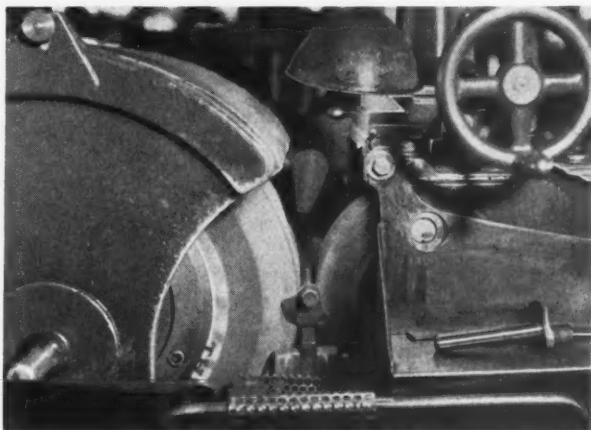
Grinding crankshafts in a Cincinnati centerless grinding machine.
